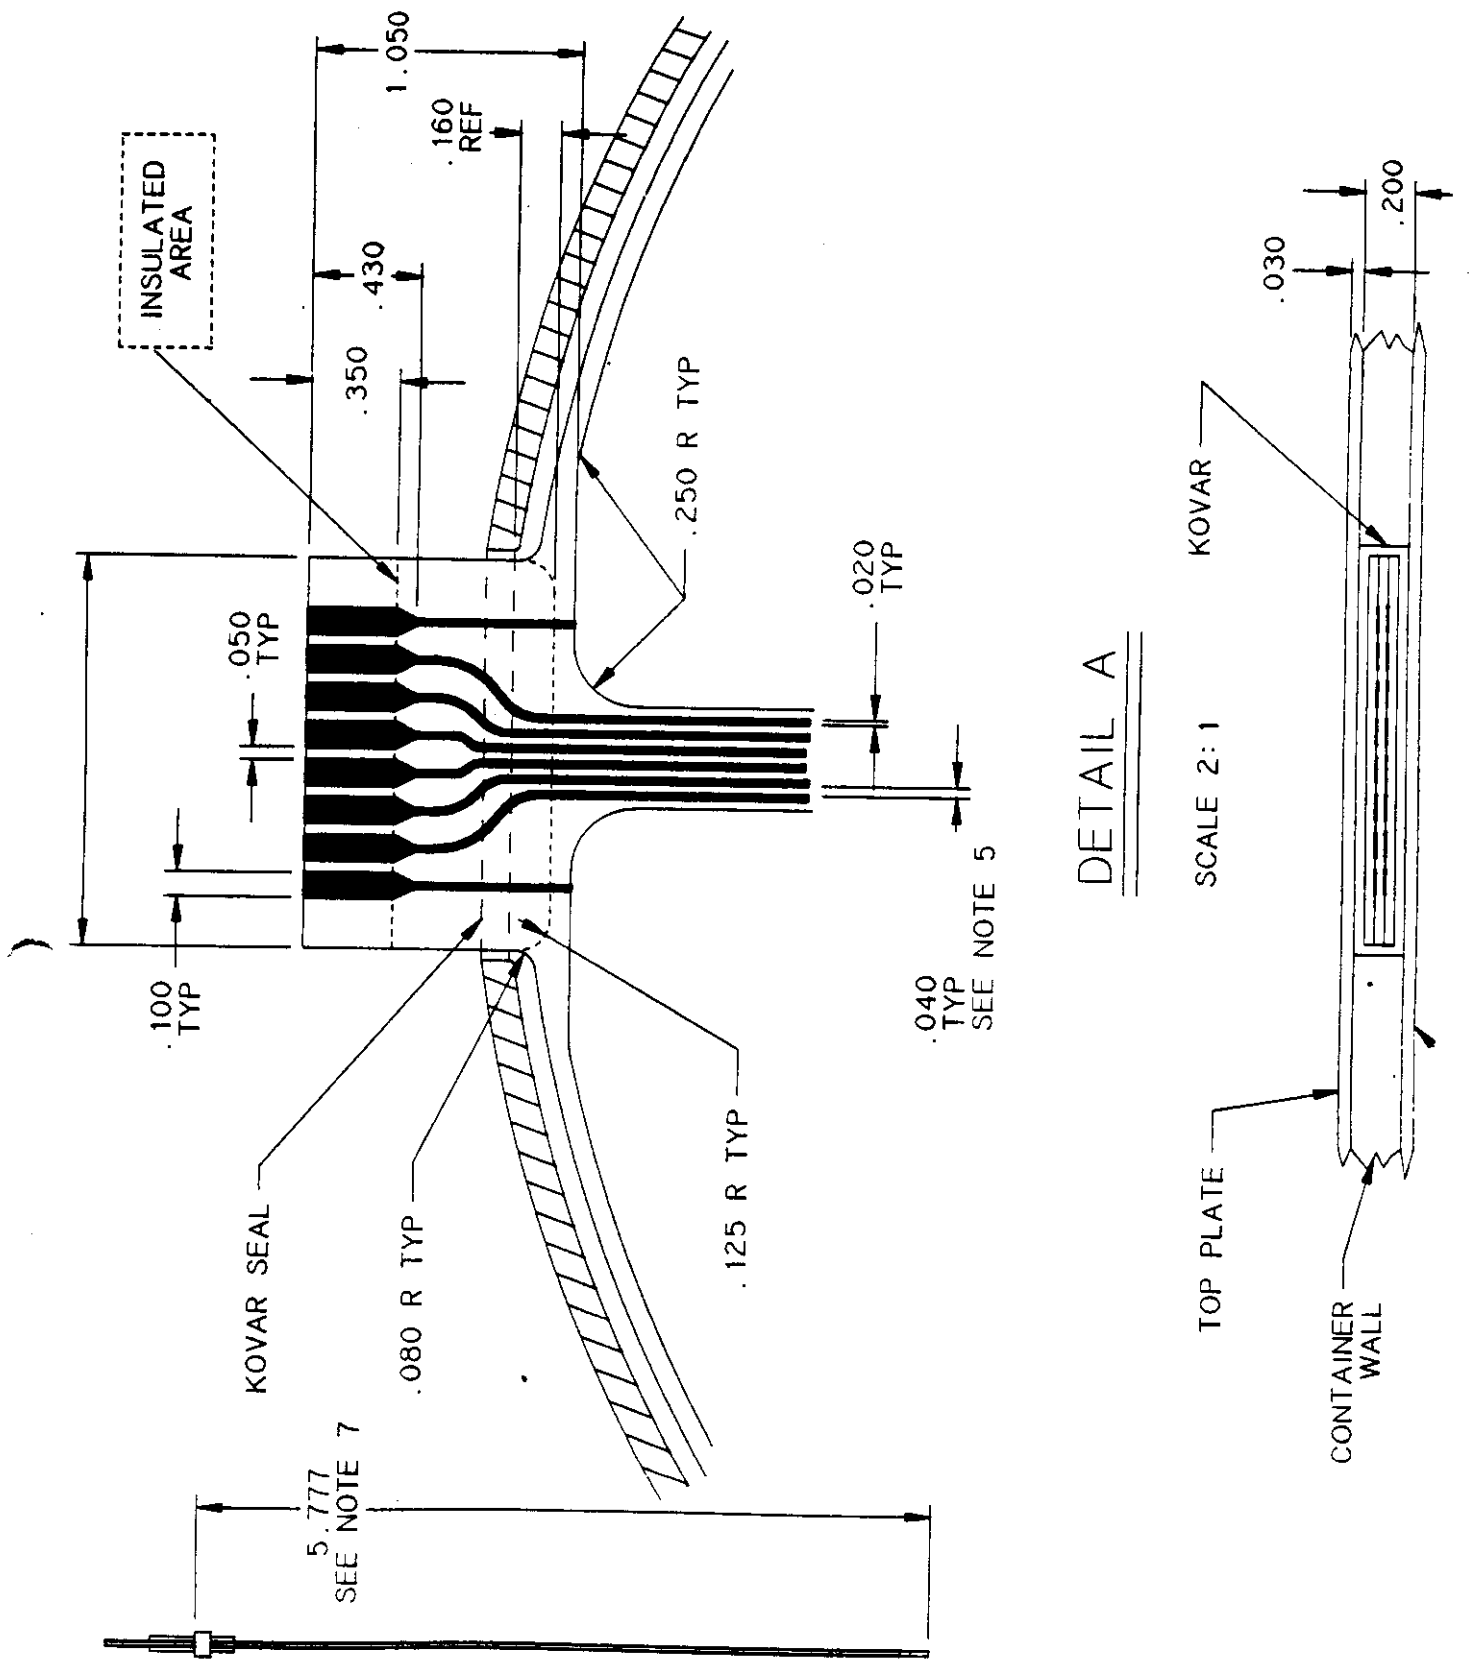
b) Detail showing insulating dielectric layer, with side and end views.
